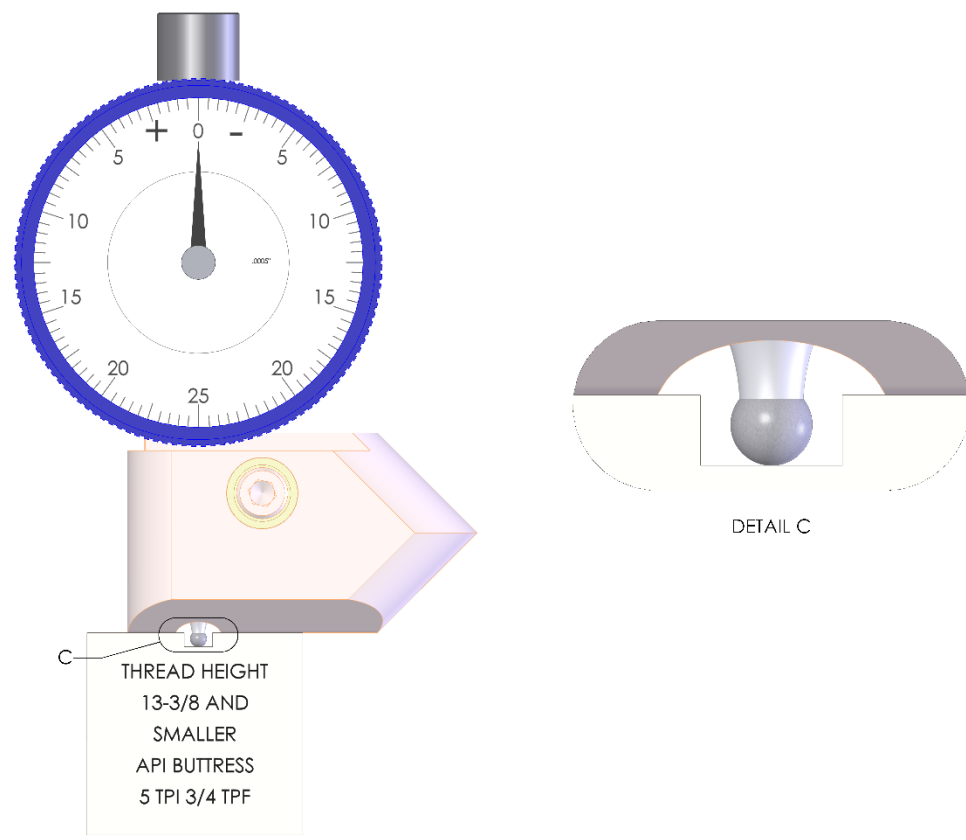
Internal/External Thread Height Gauge on Setting Standards (Buttress Thread Height Gauge on Block)
